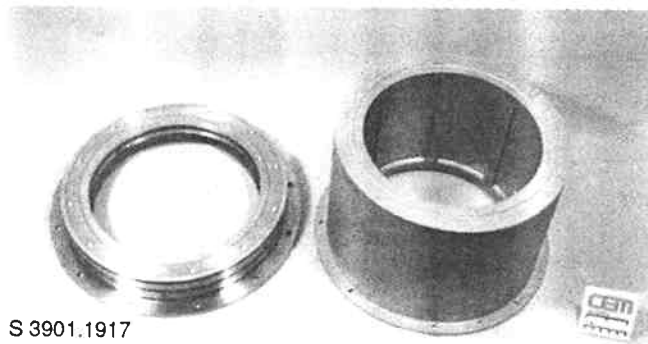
Photo of radial hydrostatic bearing inserts and seal assemblies
